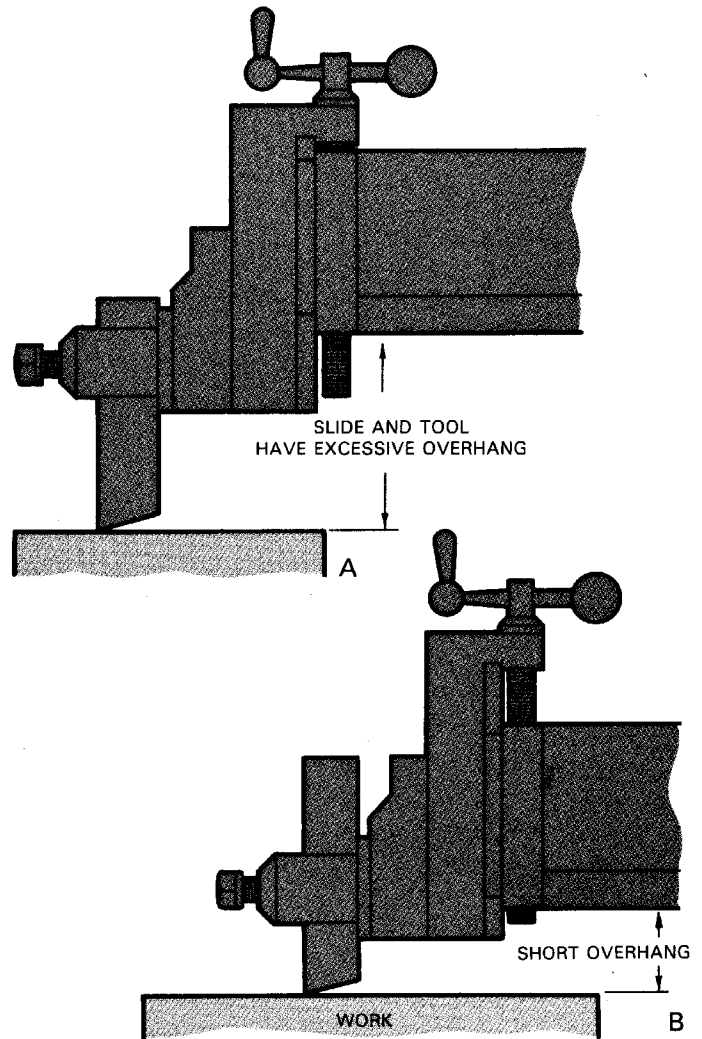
Avoid excessive overhang of slide and/or cutting tool. A—Excessive overhang causes chatter, producing a rough finish. B—Keep slide up and a short grip on tool for increased rigidity.
